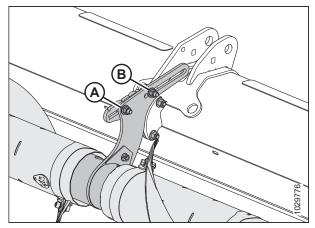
Initial Position of Adjustable Mounts – Two-Piece Auger
